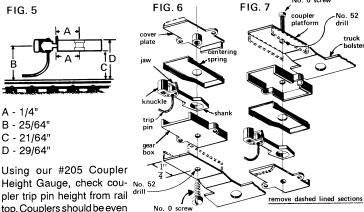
shows at what height couplers must be mounted to trucks. On some trucks, you may be able to use existing coupler platform with some modification as shown in Figs. 6 through 9. On other trucks, a completely new coupler extension may have to be fabricated from styrene or brass as shown in Fig. 10.
